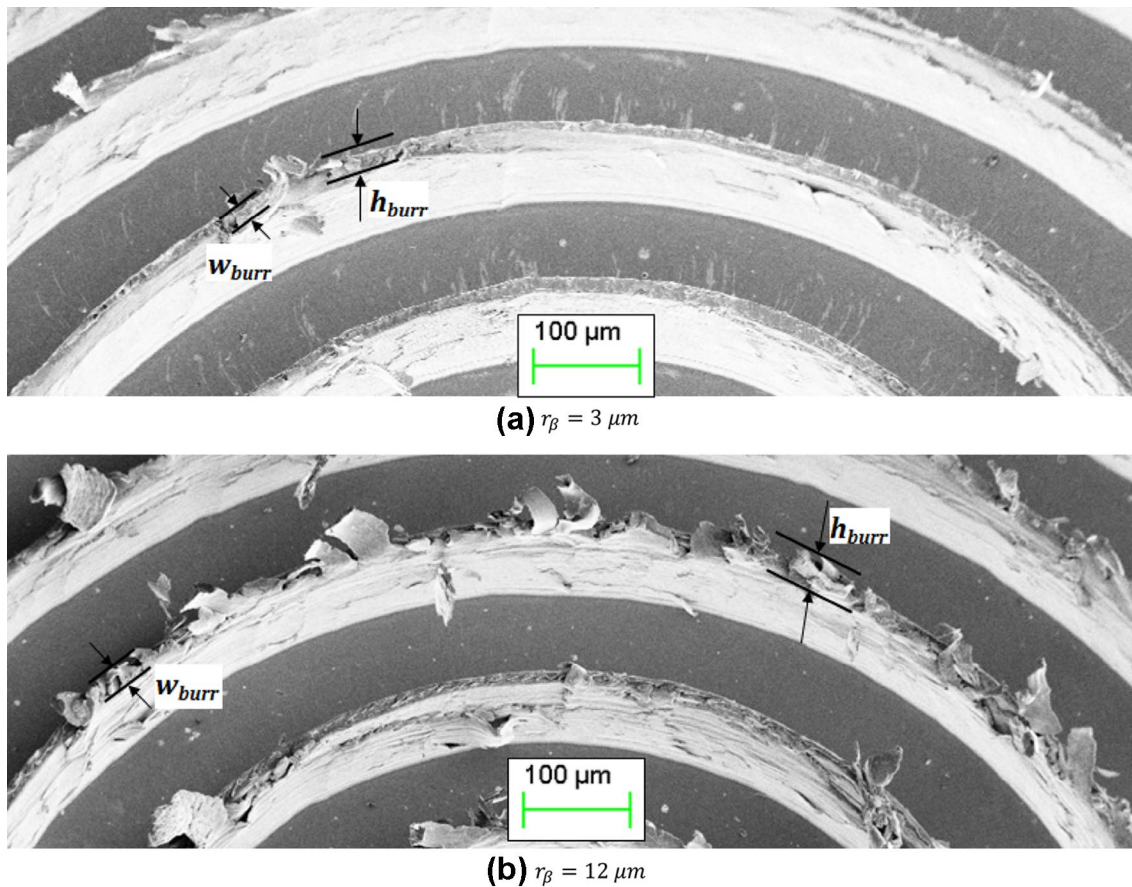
Top burr formation during full immersion micro-milling of titanium alloy Ti-6Al-4V; a unworn tool and b worn tool
